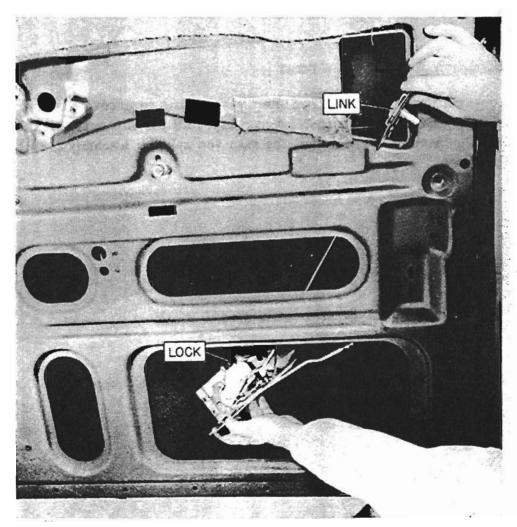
On Front Doors Disengage the Link and Pull It Out Through the Upper Access Opening.
